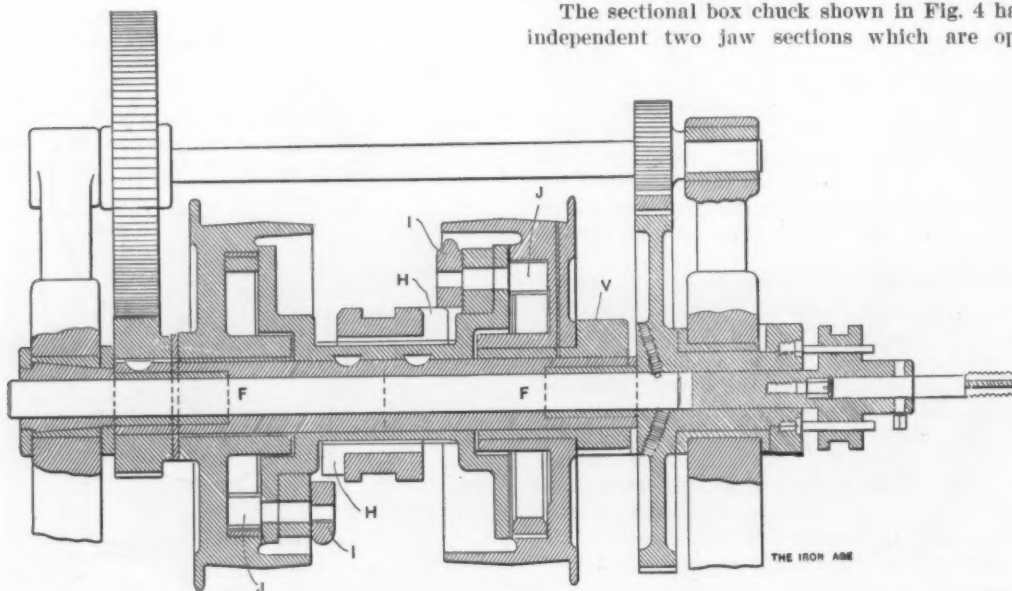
Detail of the Fourth Spindle, Showing the Cam Shaft Drive.
